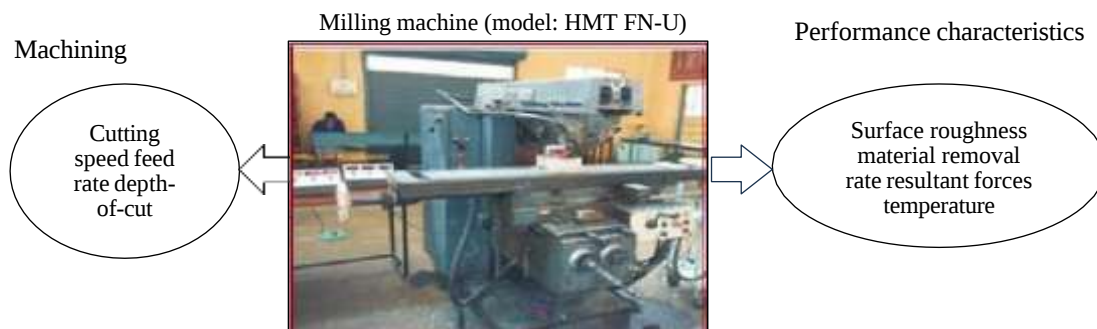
Experimental setup for milling of Al6351 alloy plates [22].
